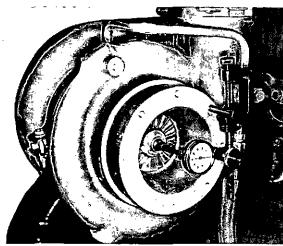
(N11956) Checking turbocharger bearing end clearance
